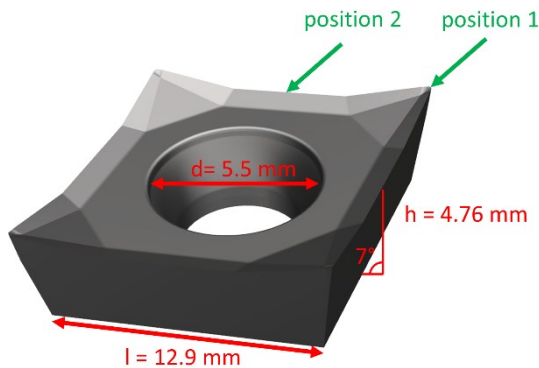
Cutting insert in CCGT 120402FN-27 geometry. Dimensions: insert shape: rhombus 80° ; clearance angle 7° , 12.9 mm cutting edge length, 4.76 mm insert thickness; 0.2 mm nose radius; cutting edge: sharp, cutting direction: two-sided. The two positions investigated are indicated by arrows.
